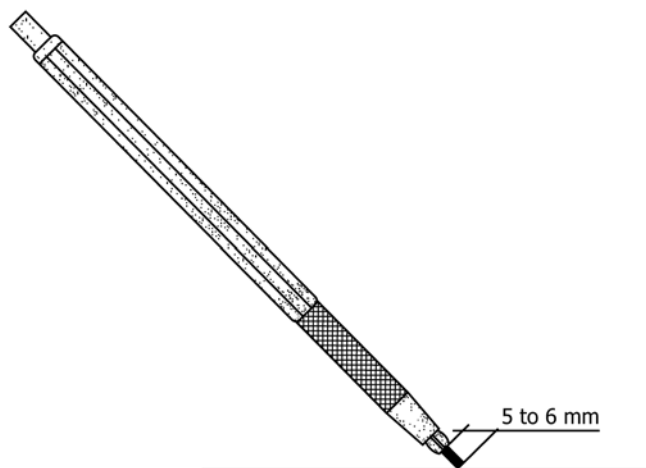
View of Mechanical Holder with Sharpened Drawing Lead
